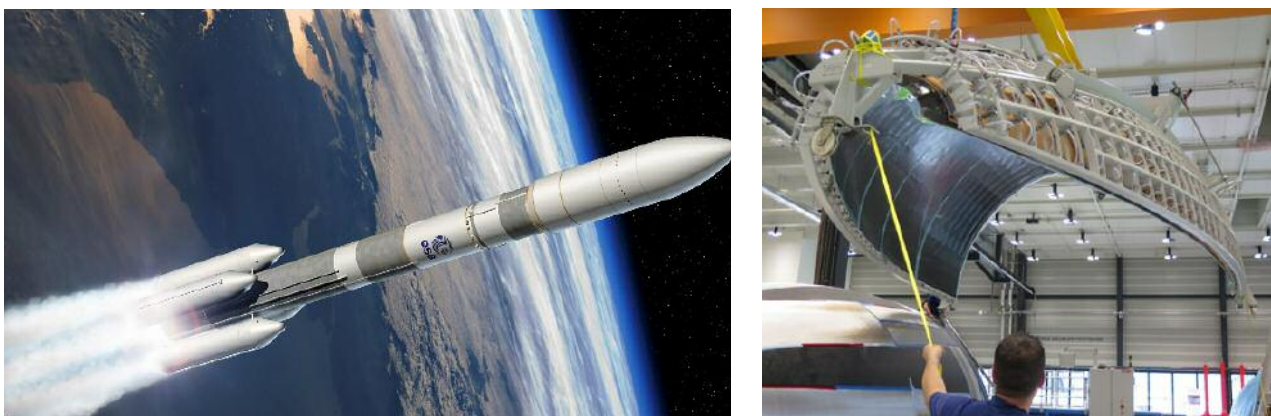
Ariane 6 fairing will be manufactured using Out-of-Autoclave (OAP) processes for costs and performances optimisation. One of the OAP manufacturing step is visible on the right picture (Courtesy of RUAG).
